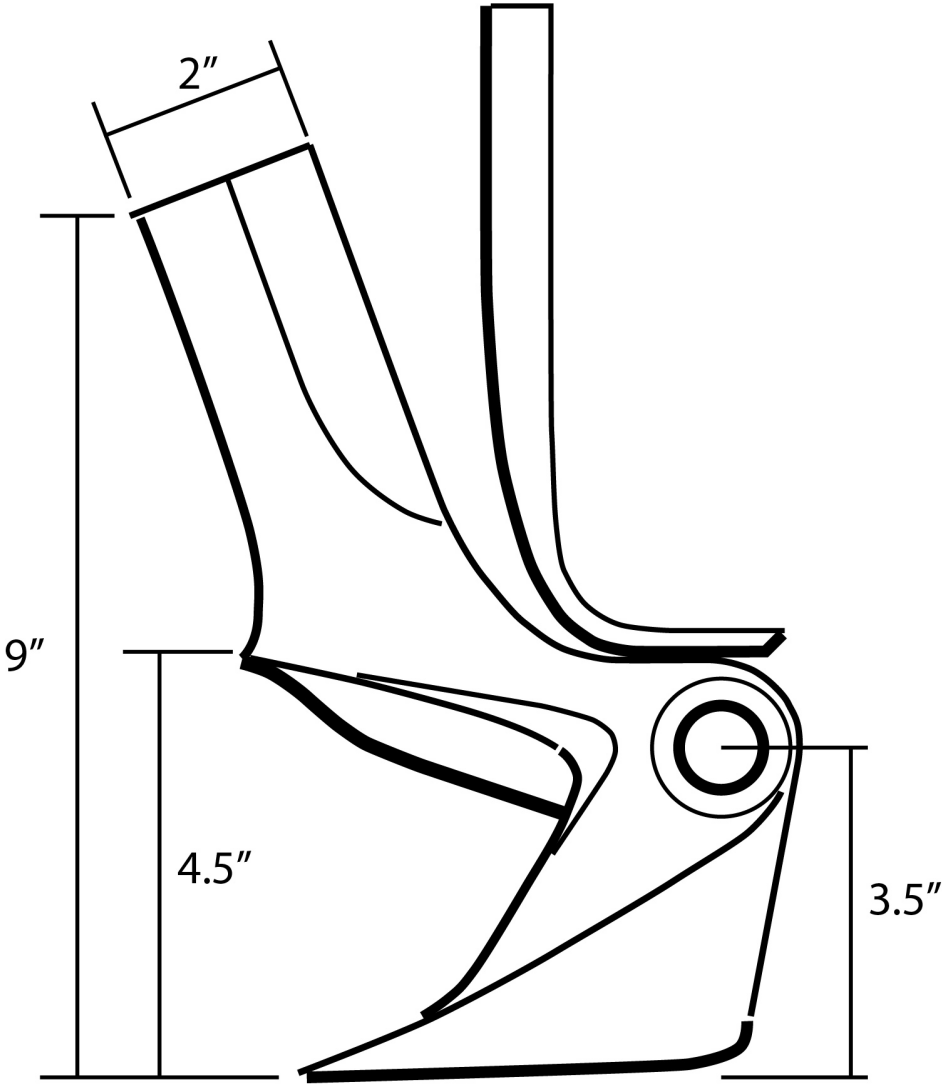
Technical Drawing of Side View With 1/8 Scale Dimensions
